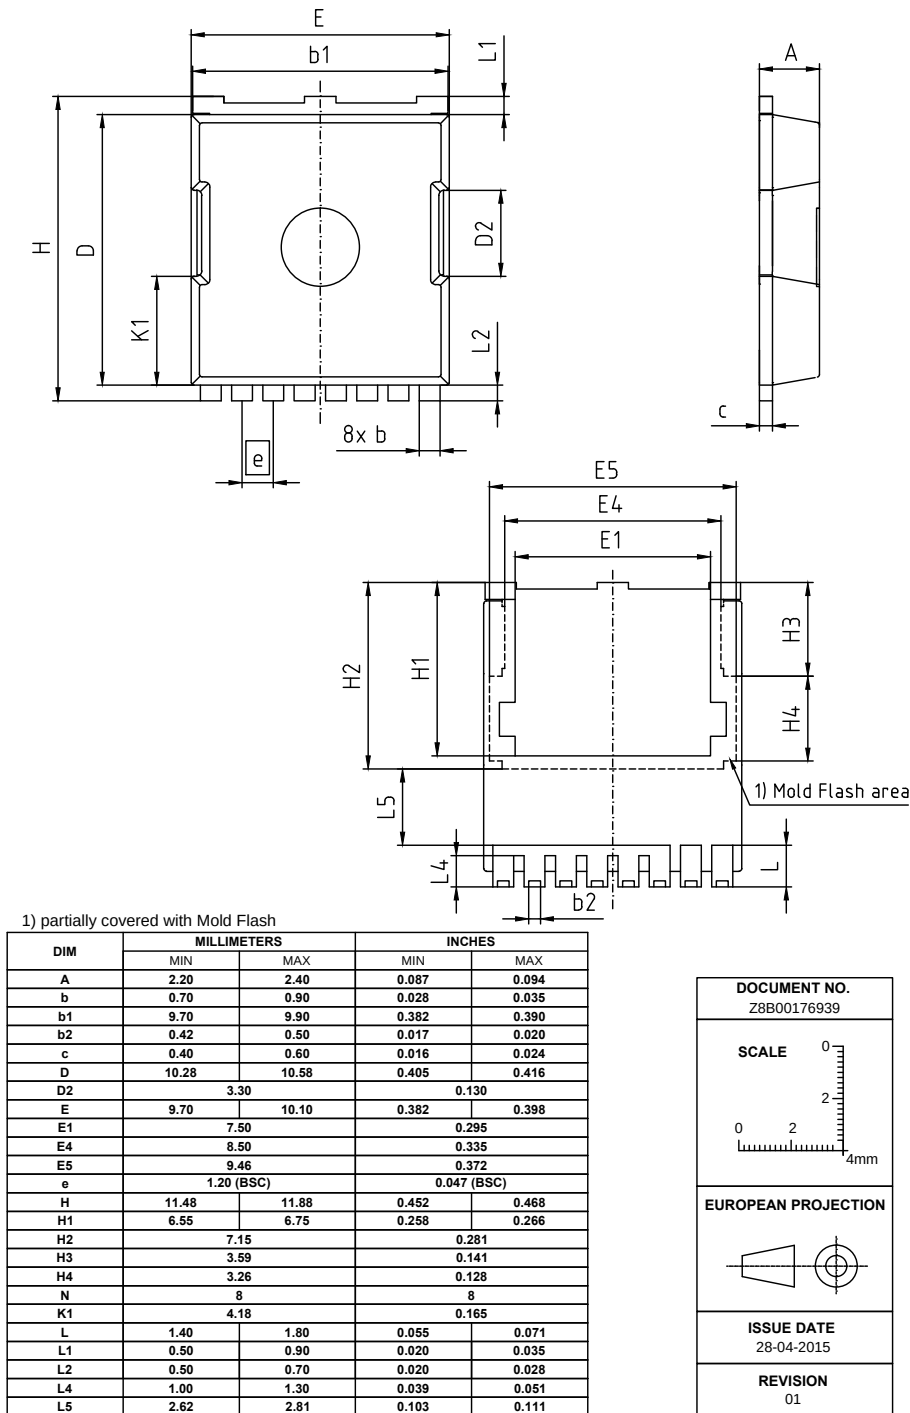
Outline PG-HSOF-8, dimensions in mm/inches
